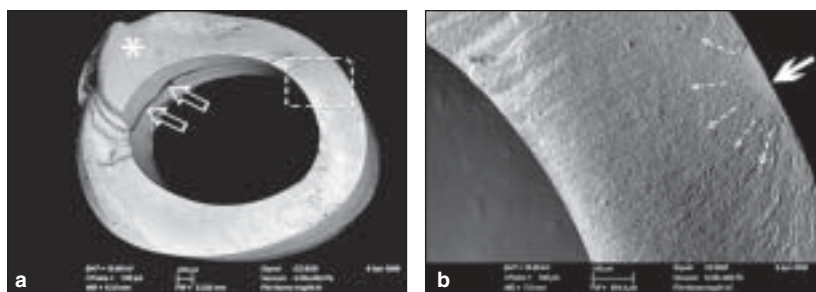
Representative scanning electron microscopy of a fractured Zr abutment after 50,000 cycles and a 400-N load. (a) A compressive curl at the compressive zone can be seen (*asterisk*). Note that two fracture lines have combined into one larger fracture at the compressive area (*open arrow*). (b) Higher magnification. The fracture origin (*solid arrow*) determined by the hackle line direction (*segmented arrows*) can be seen.
